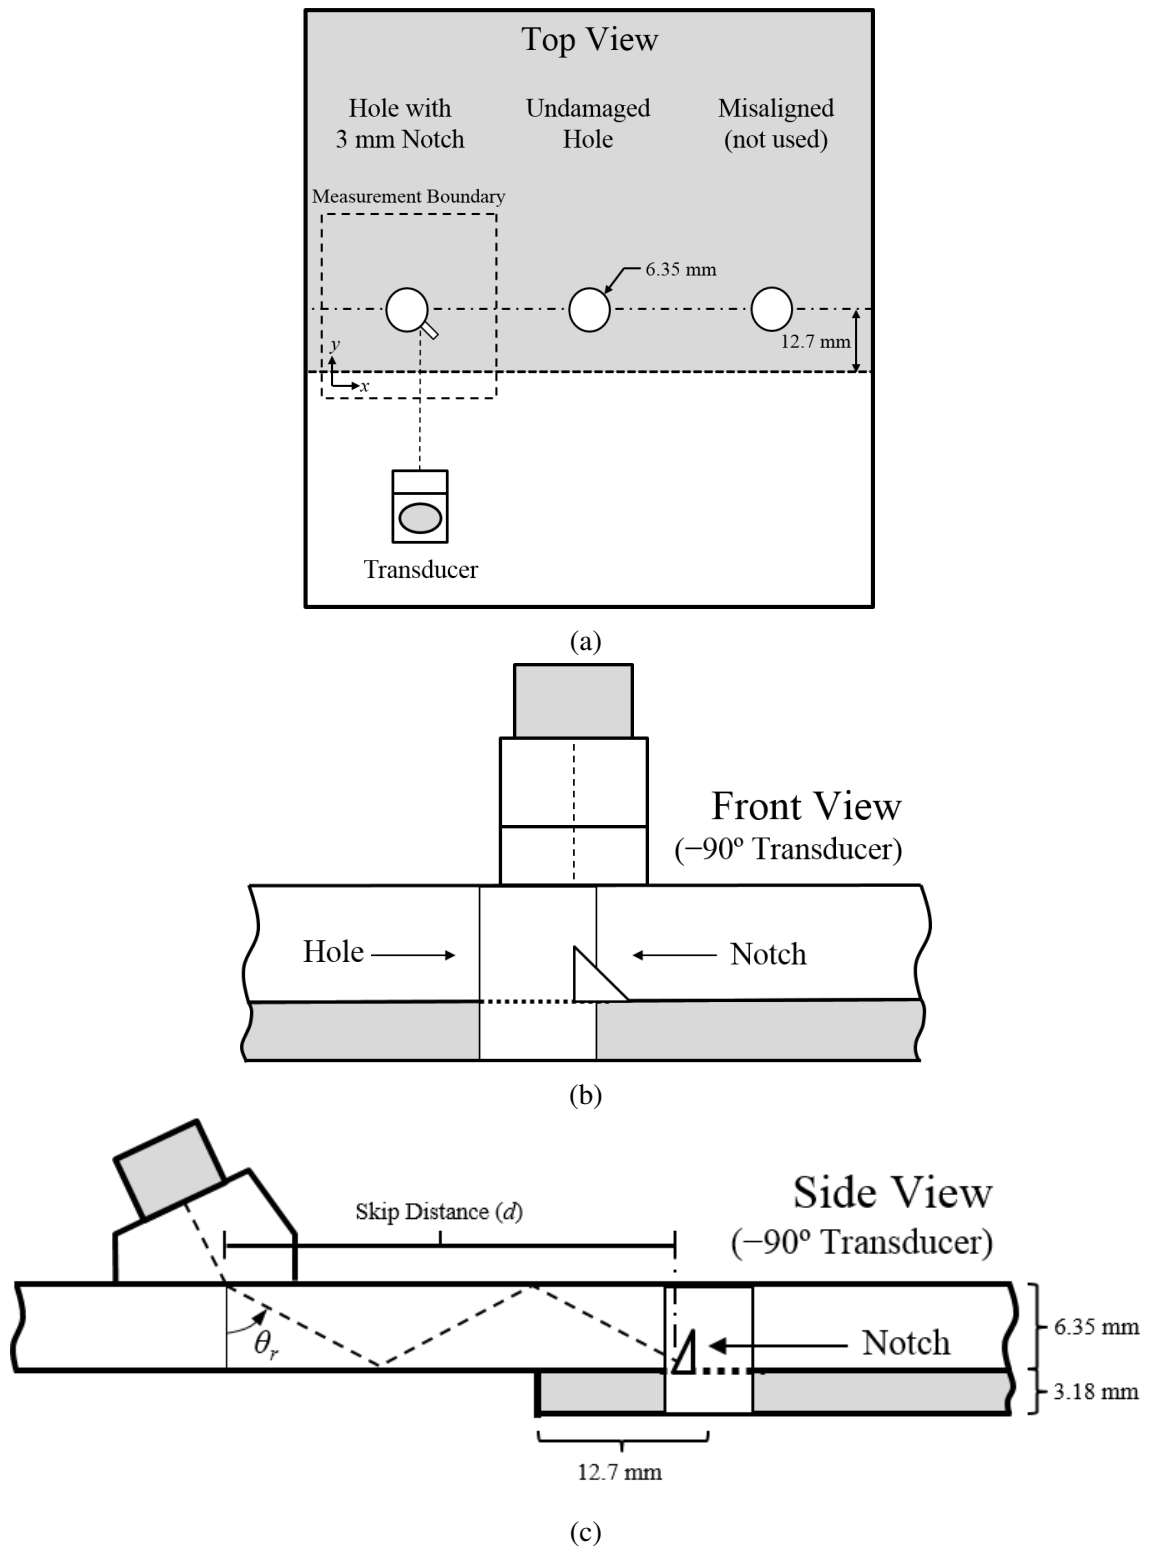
(a) Top view of bonded specimen #1 showing measurement area, (b) front view with non-skewed notch geometry, and (c) side view with beam path
